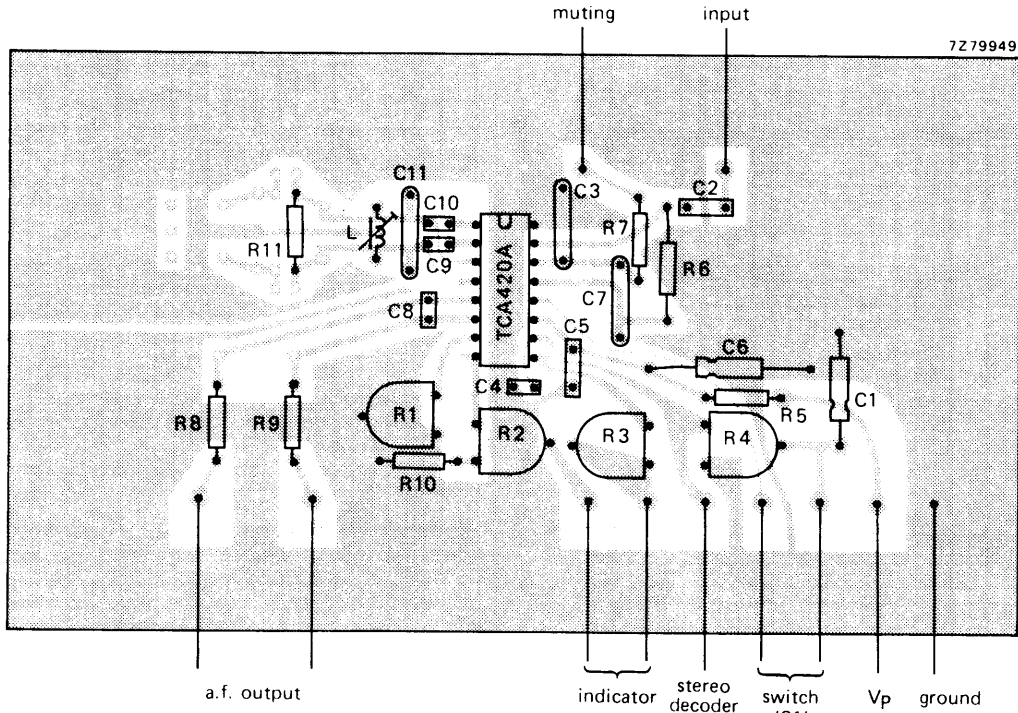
Printed-circuit board component side, showing component layout. For circuit diagram see Fig. 3.
